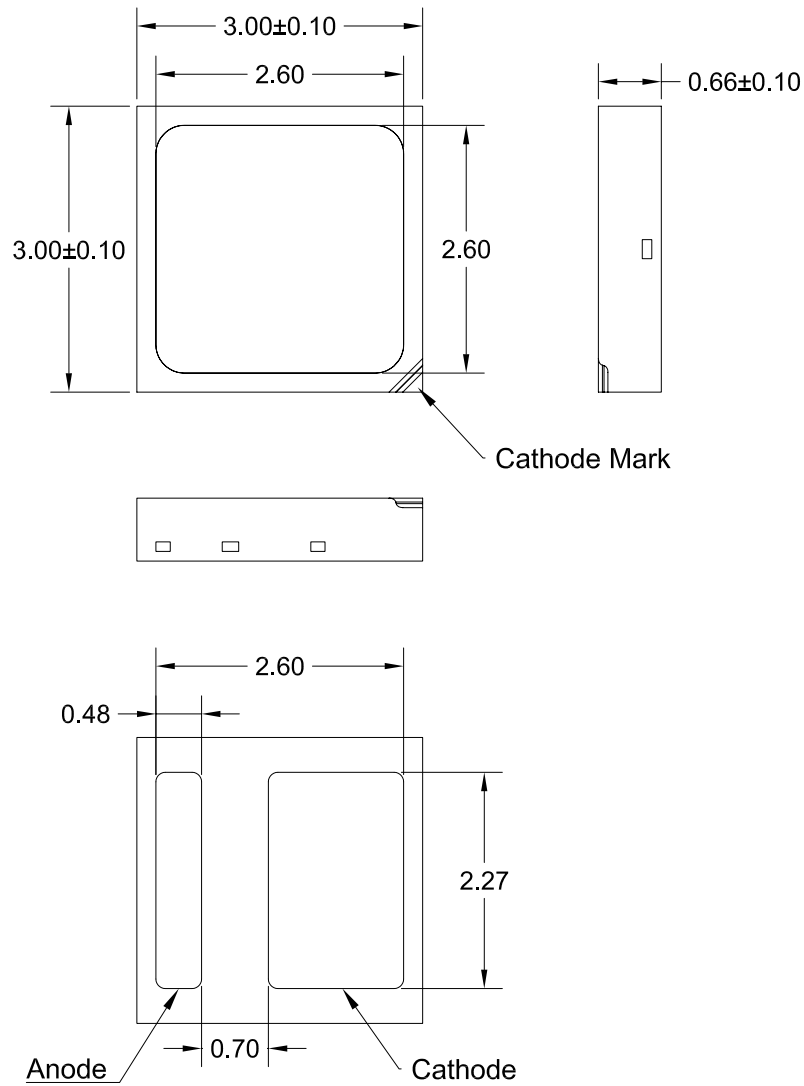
Mechanical dimensions for LUXEON 3030 HE Plus.
